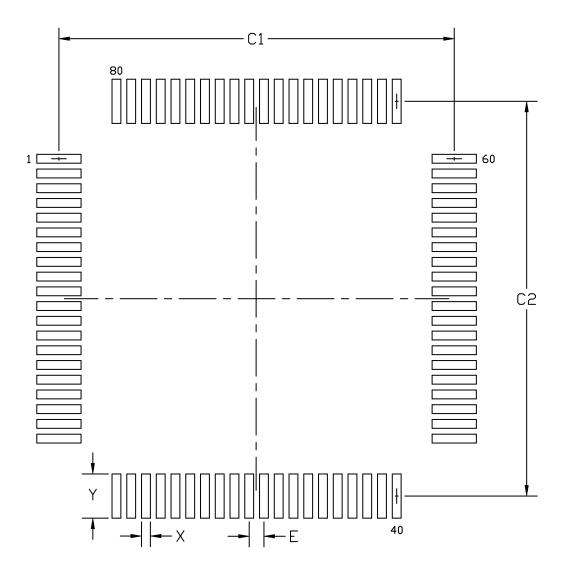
TQFP80 PCB Land Pattern Drawing
